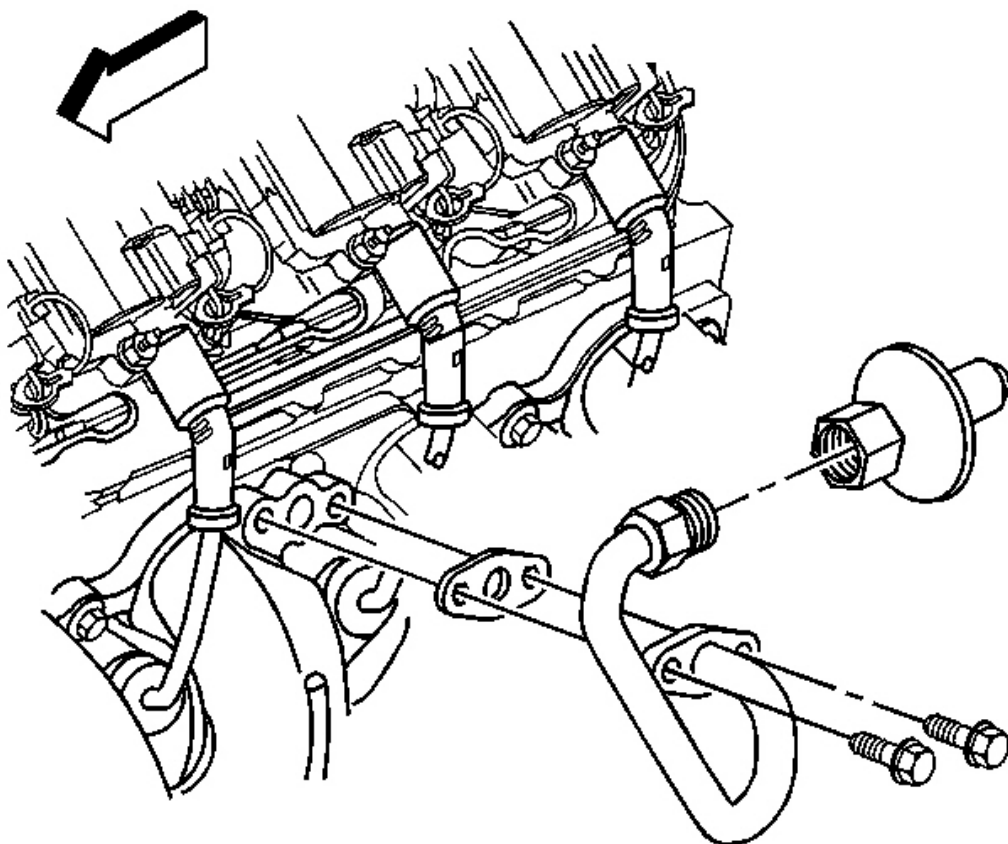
AIR Pipe Bolts, Exhaust Manifold & Bolts
